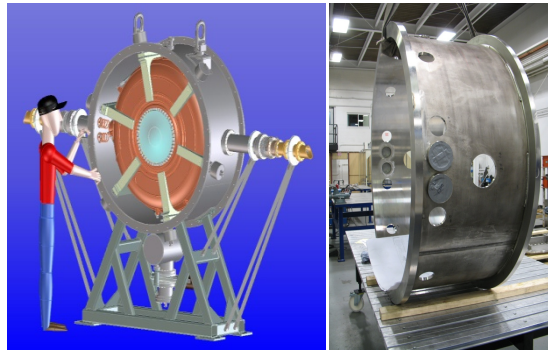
Single cavity vacuum vessel design (left); fabrication of the single cavity vessel at Keller Technology (right).
